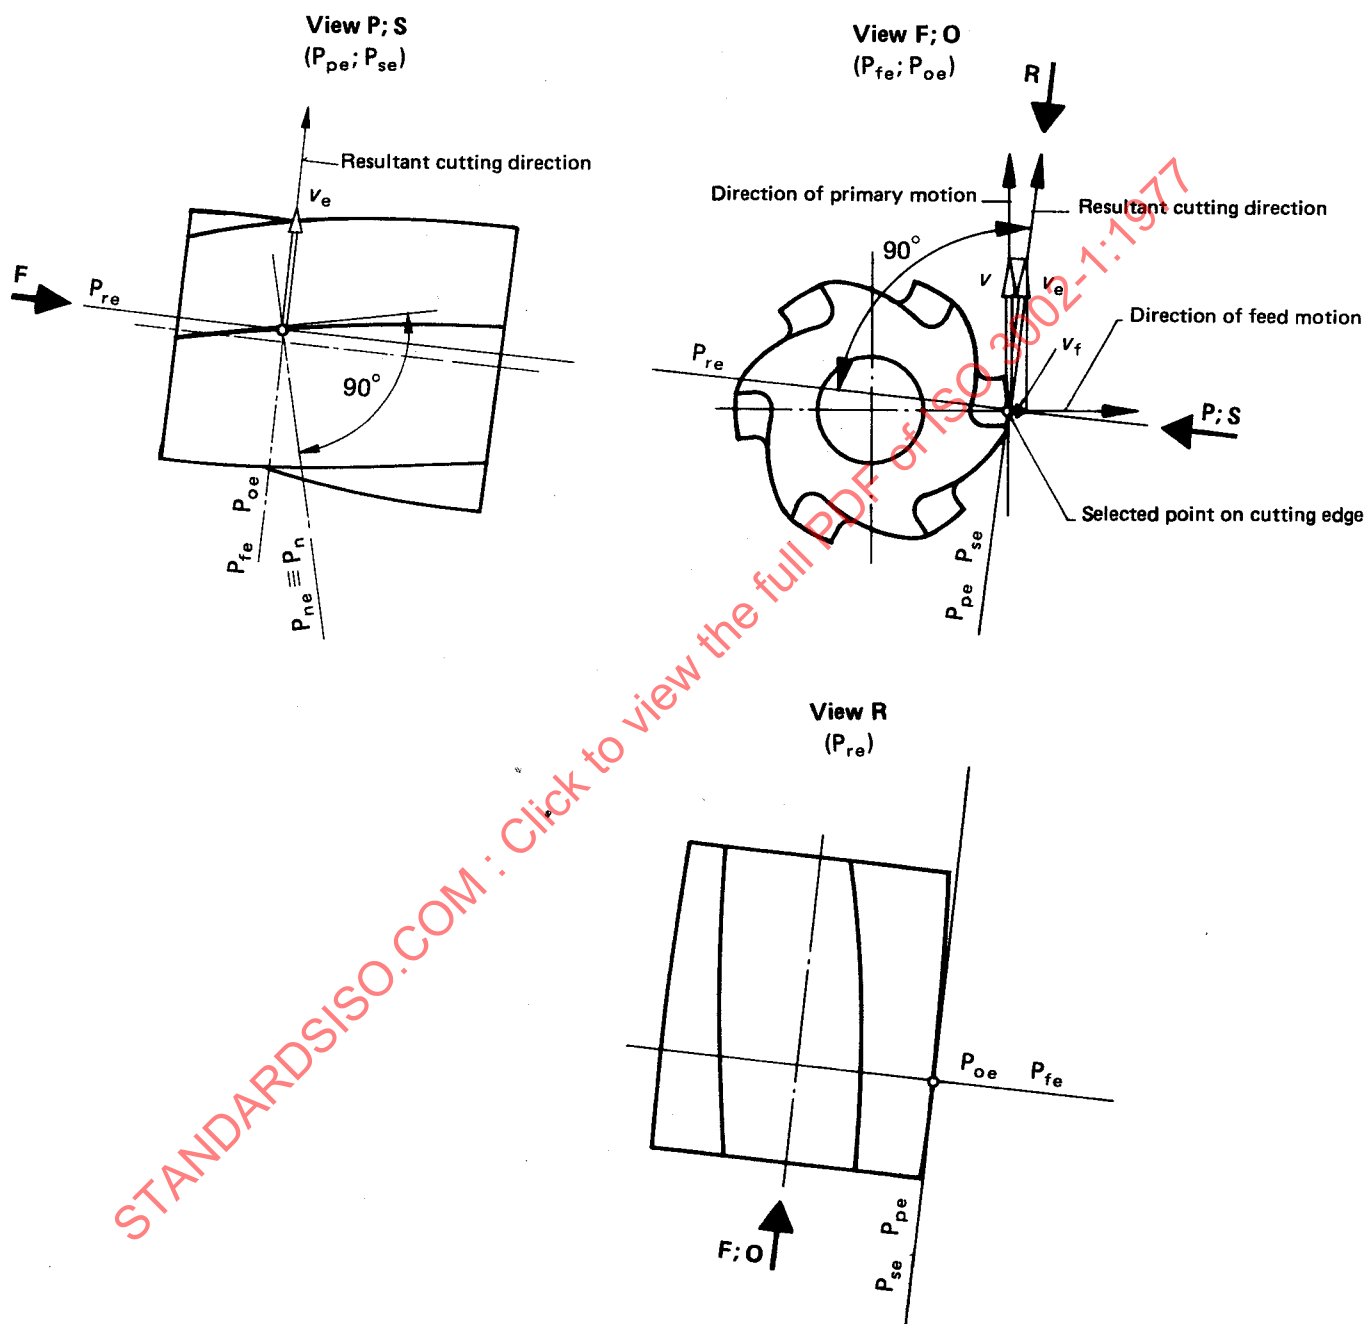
Planes in the tool-in-use system — Slab milling cutter
